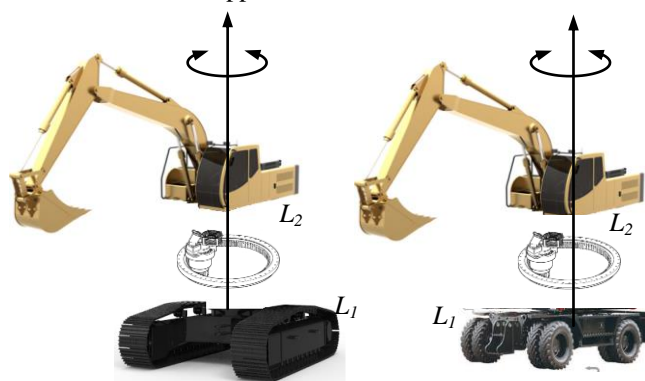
Slewing platform drive mechanism of hydraulic excavators with: a) crawler support and movement member, b) support and movement mechanism on wheels
